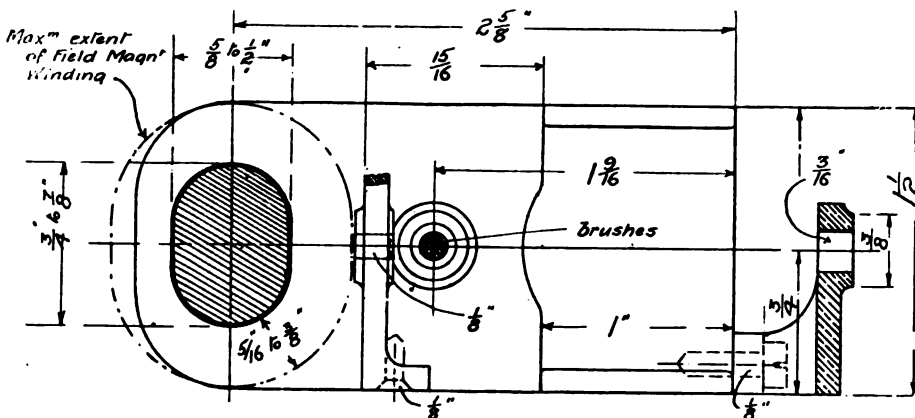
PLAN OF 2-IN. GAUGE MOTOR. (Full size.)
